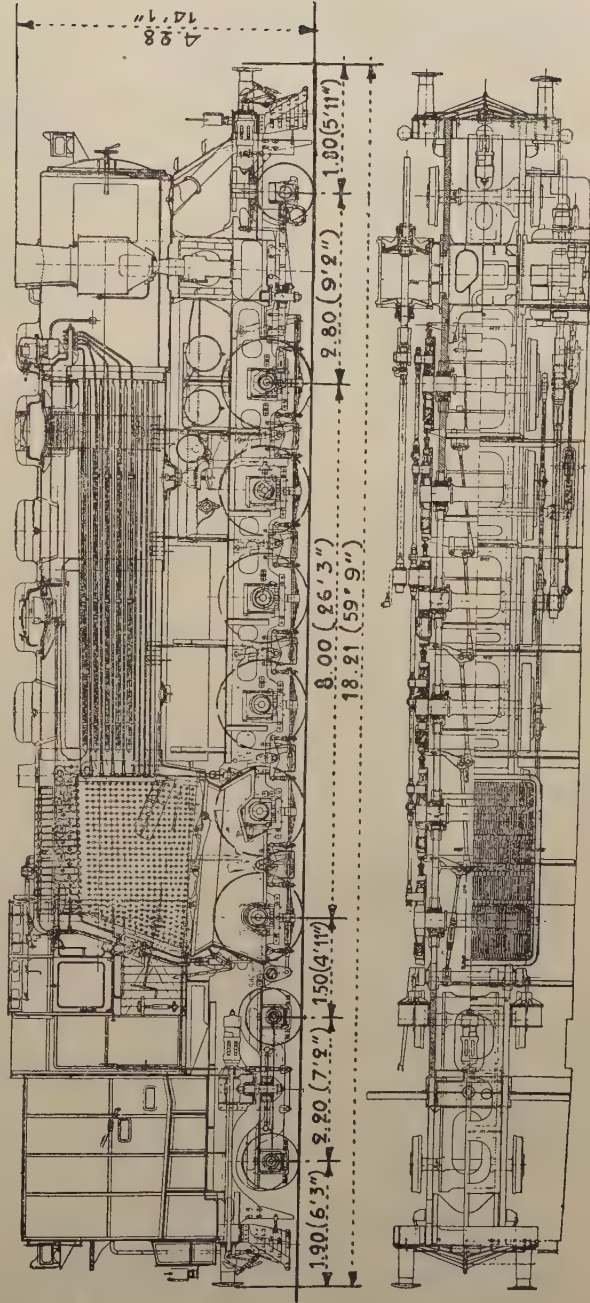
2-12-4-T locomotive of the Bulgarian State Railways. — Longitudinal section and plan.
